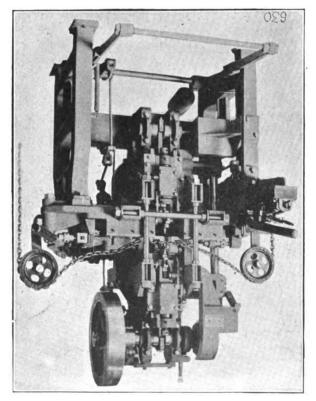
Semi-Automatic Chain Welder Courtesy of Thomson Electric Welding Company
